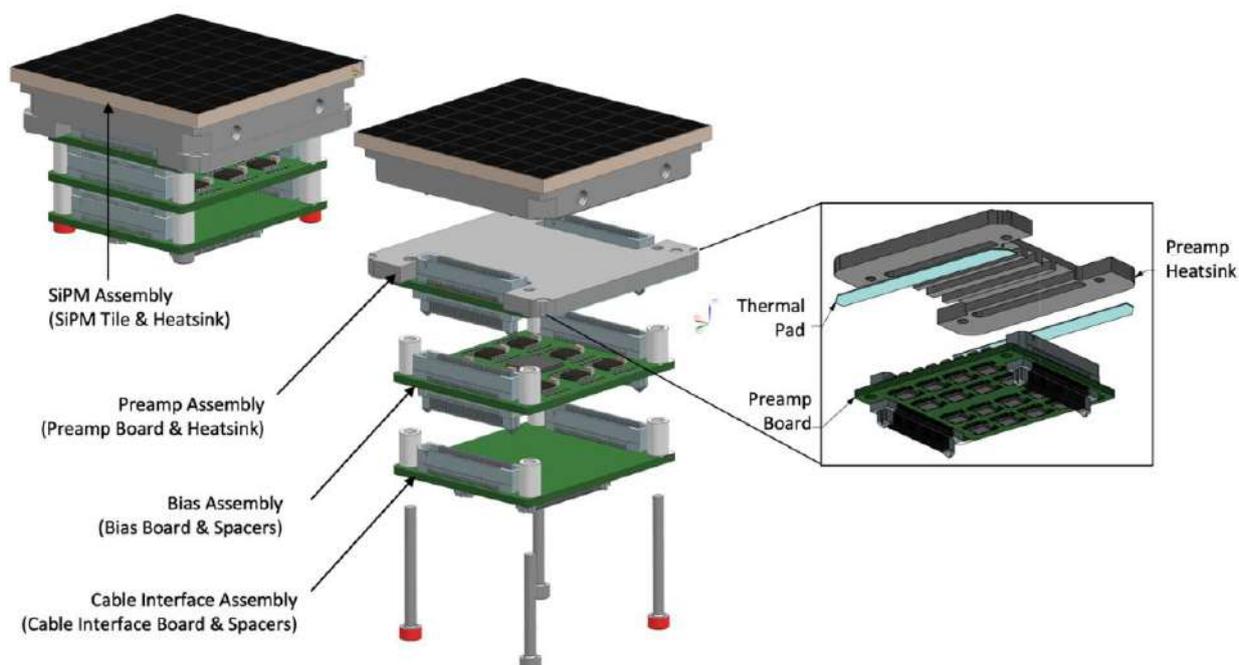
FPE, showing the Preamp Assembly, Bias Assembly, Cable Interface Assembly with SiPM Assembly attached.
